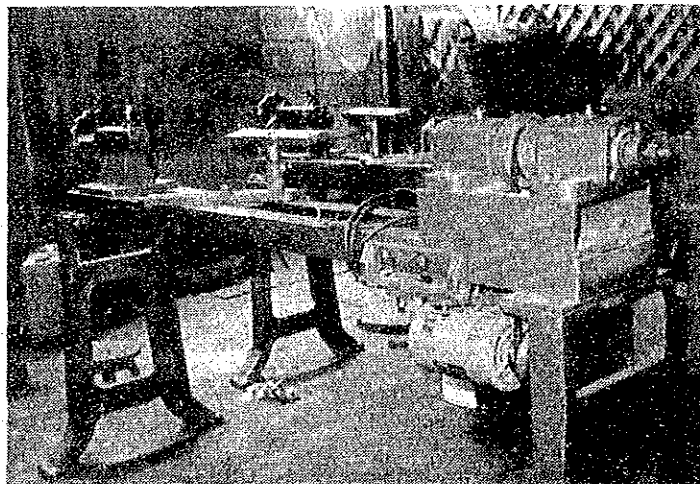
describes a lathe for wood working, which is not a machine requiring accuracy.
